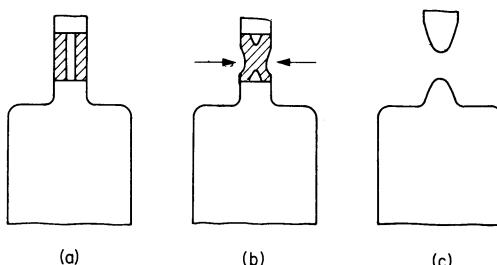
Sealing-off with solder insert: (a) solder inserted in the exhaust tube; (b) sealing-off; (c) pinched tube
